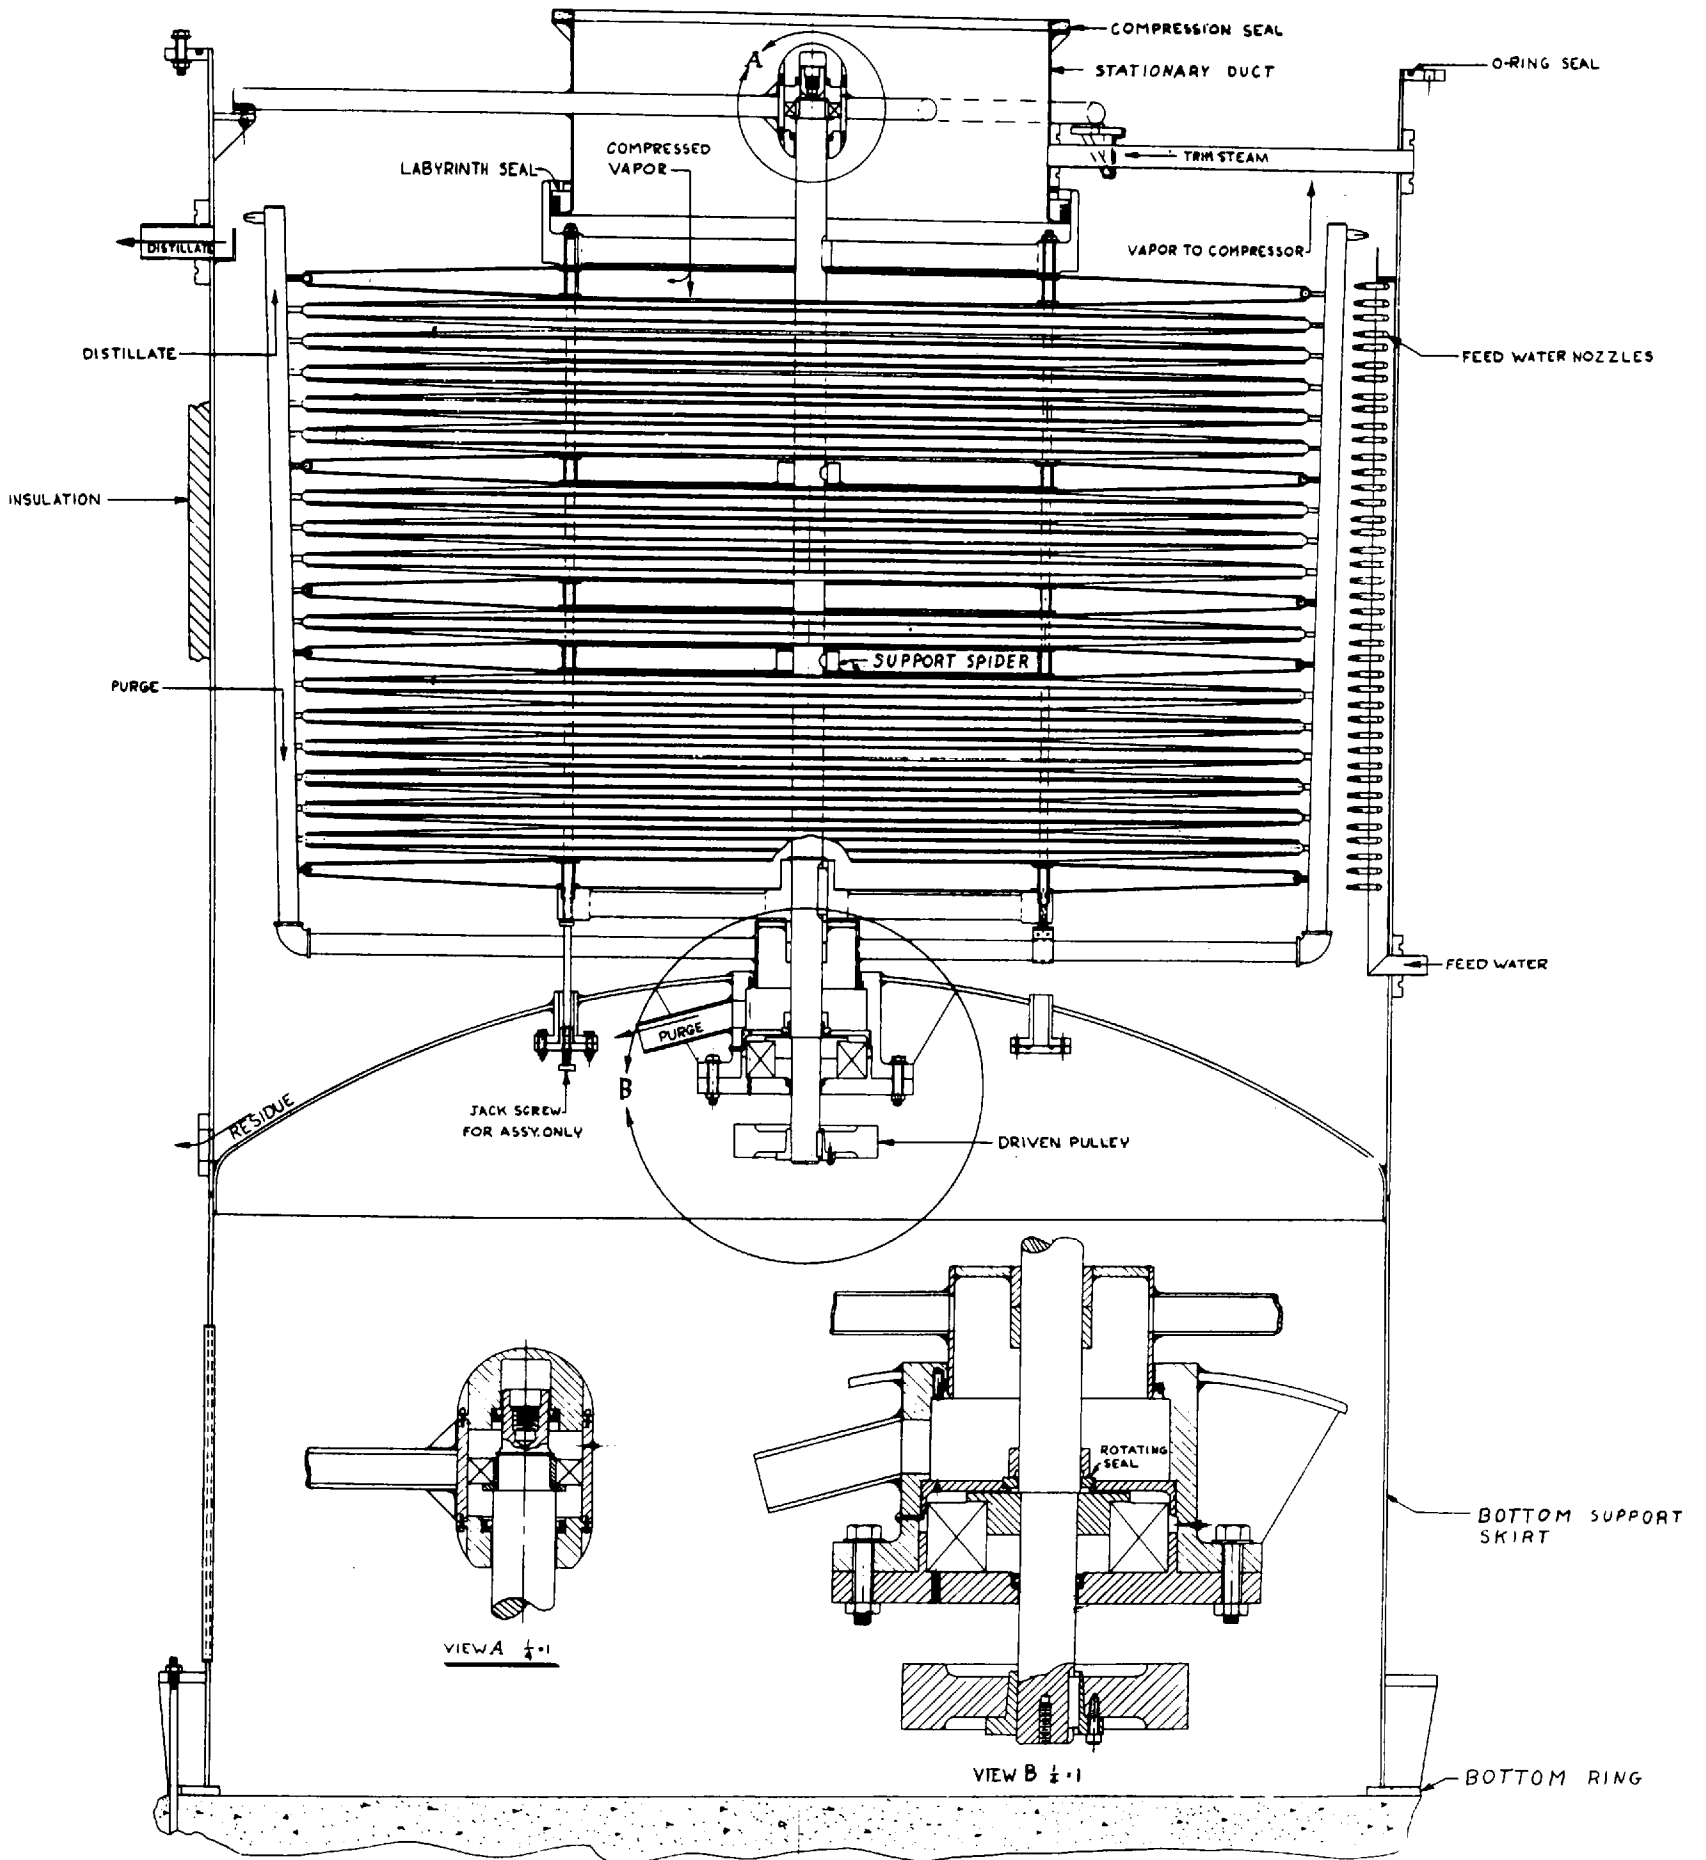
ASSEMBLY DRAWING OF A 20-ROTOR HICKMAN STILL
